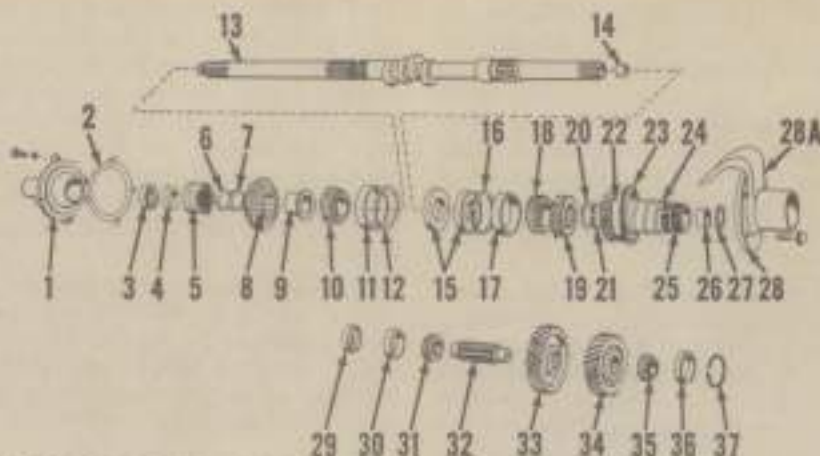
Exploded view of D-14 and D-15 clutch shaft and associated parts. Lip seals (2 & 4) face toward rear.
